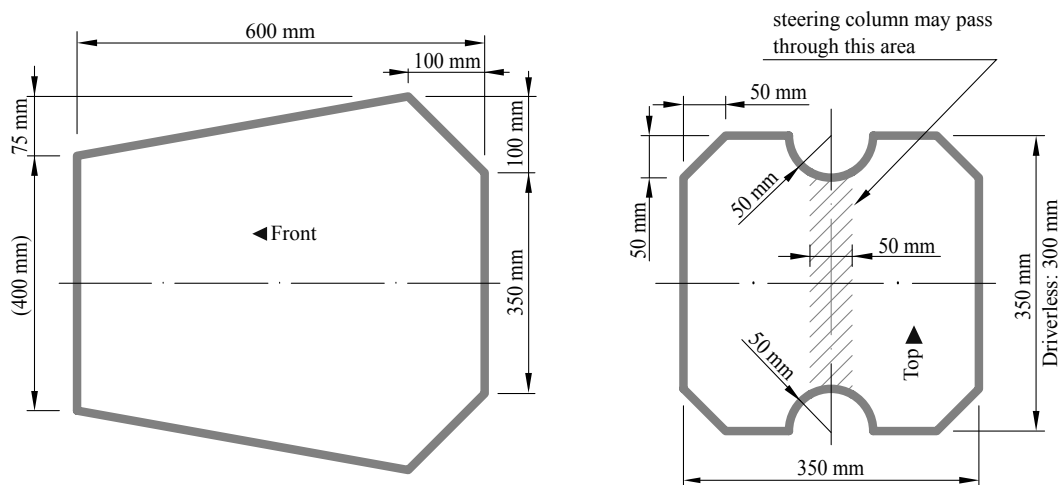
Cockpit opening template (left) and cockpit internal cross section template (right)
